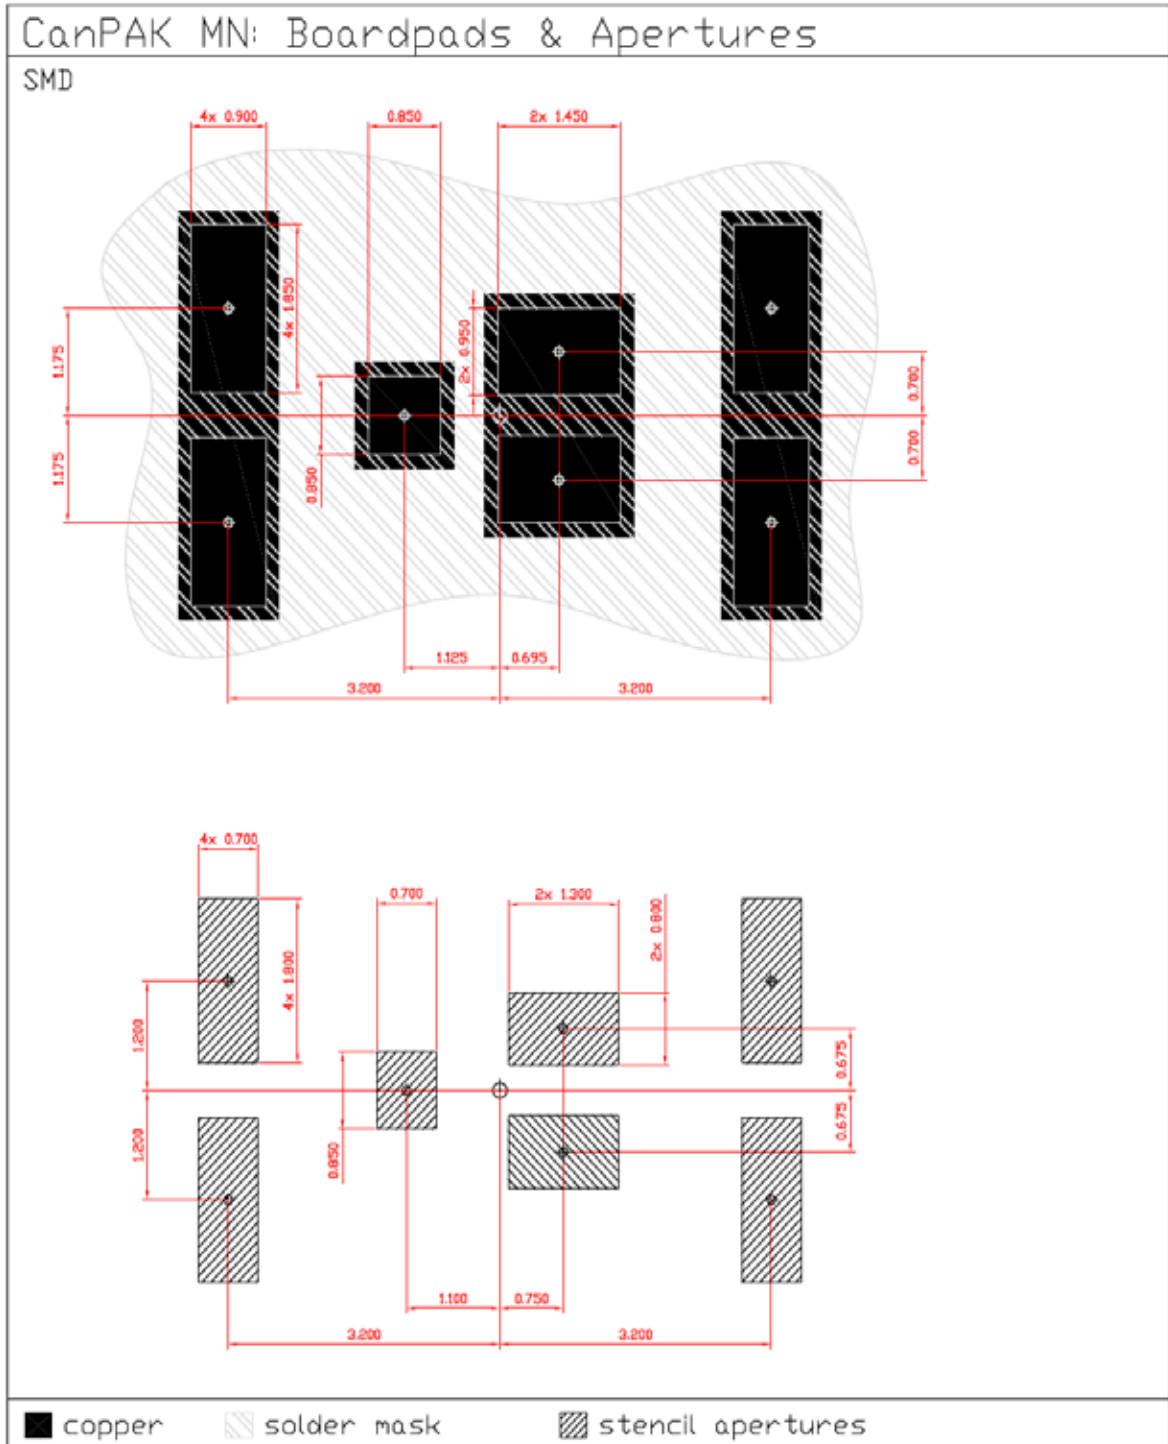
Dimensions in mm/ Recommended stencil thickness 150µm
